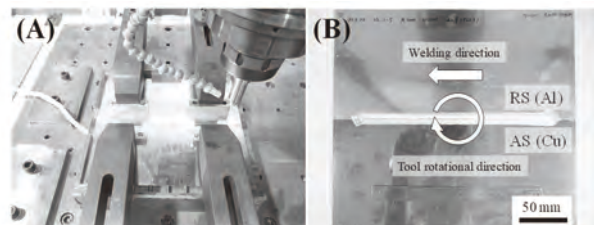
Appearance of (A) clamped test pieces, (B) joining material of Al and Cu.
